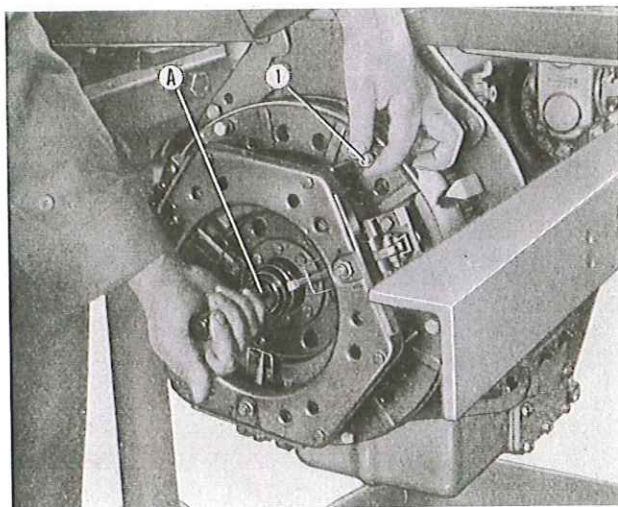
Refitting the clutch assembly to the engine flywheel.
